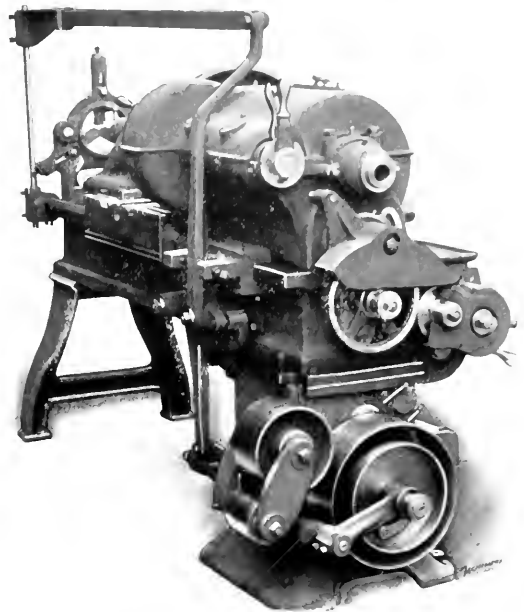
End View of Bradford Lathe showing Arrangement of Single Pulley Drive
